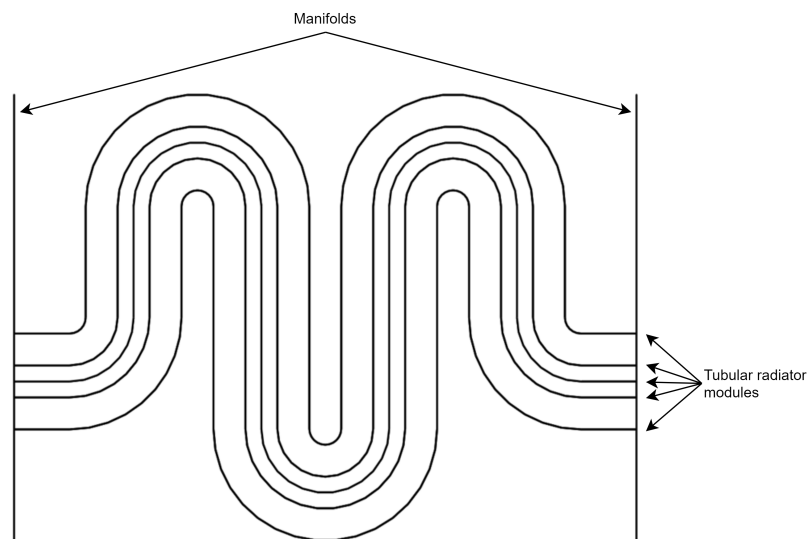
Schematic representation of the tubular radiator assembly.
